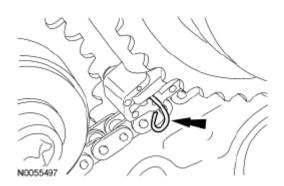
Positioning RH Secondary Timing Assembly Onto Camshafts Courtesy of FORD MOTOR CO.
